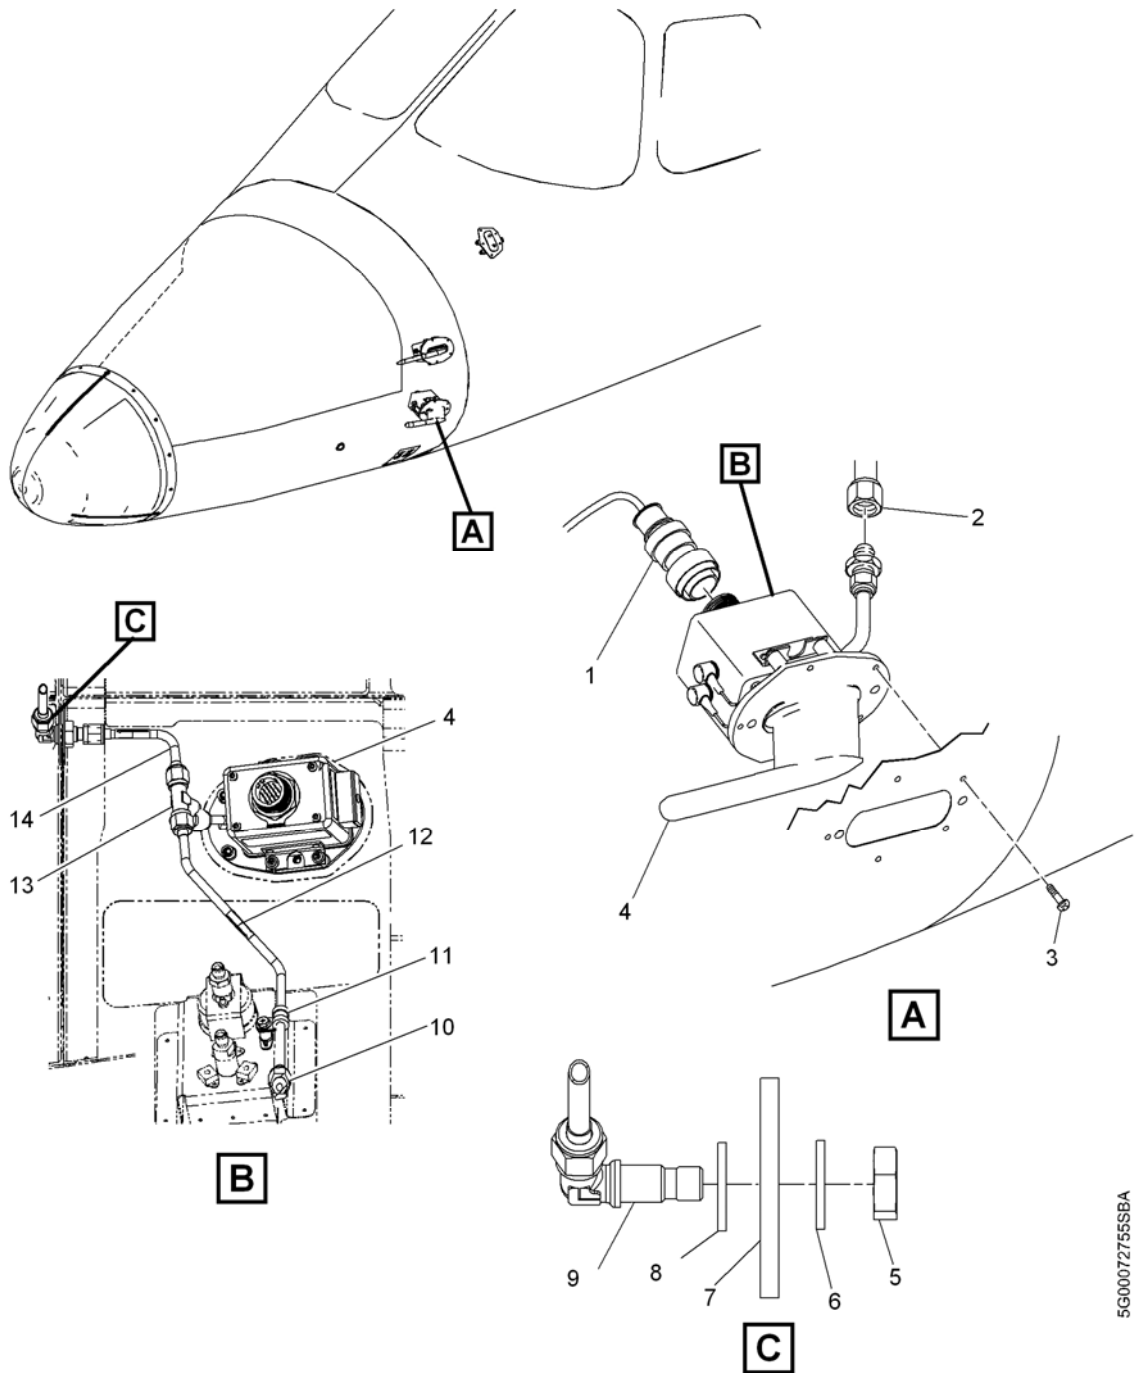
Pitot/AOA Assembly Removal (Sheet 2 of 2)
